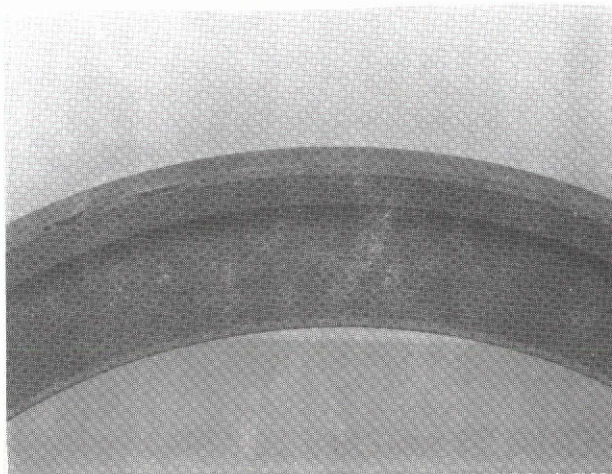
Upstream side of anode pole piece insert, before test, showing tantalum plasma-sprayed interior surfaces.
